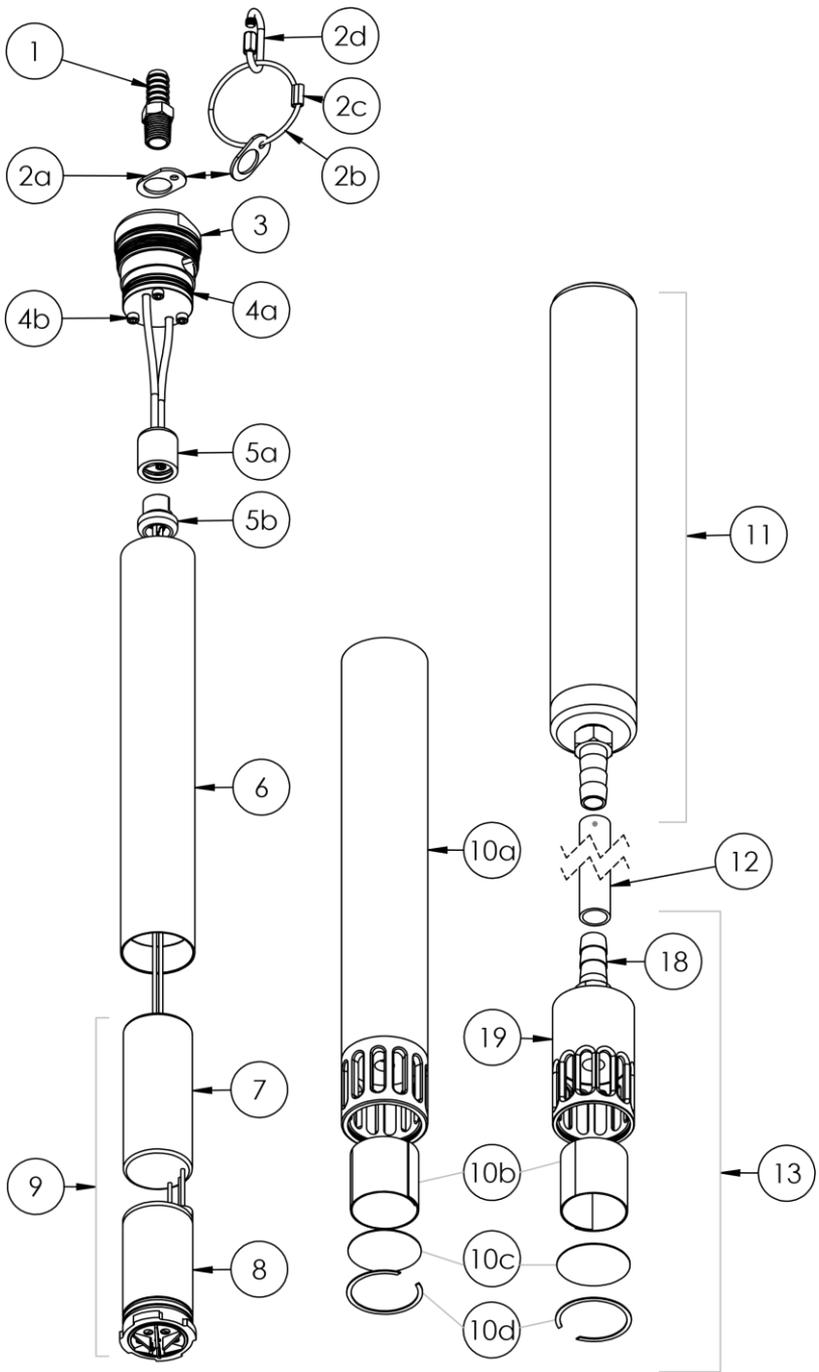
Geosub 2 Pump and Drop Tube Assembly
